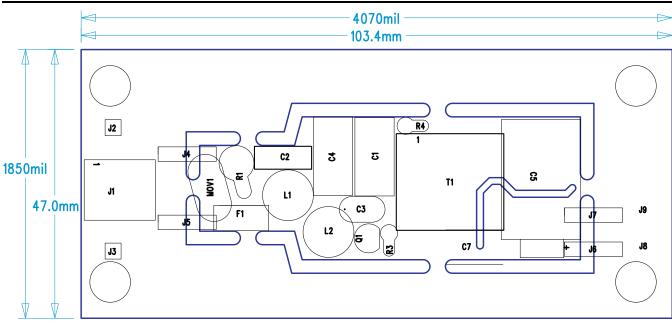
LM3447-A19-230VEVM Top Assembly Drawing (top view)
